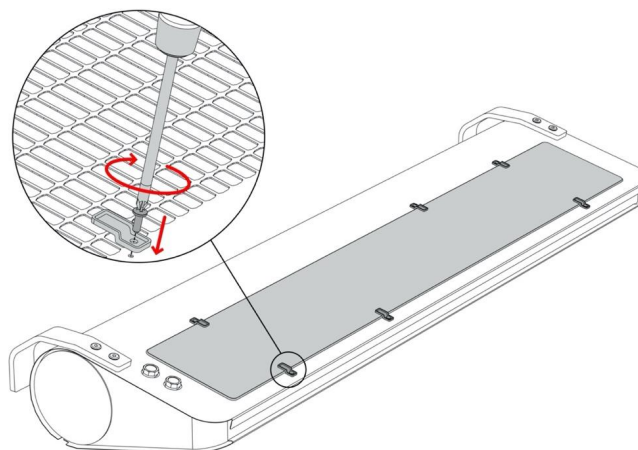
MOUNTING AND EXCHANGING THE AIR FILTER.
